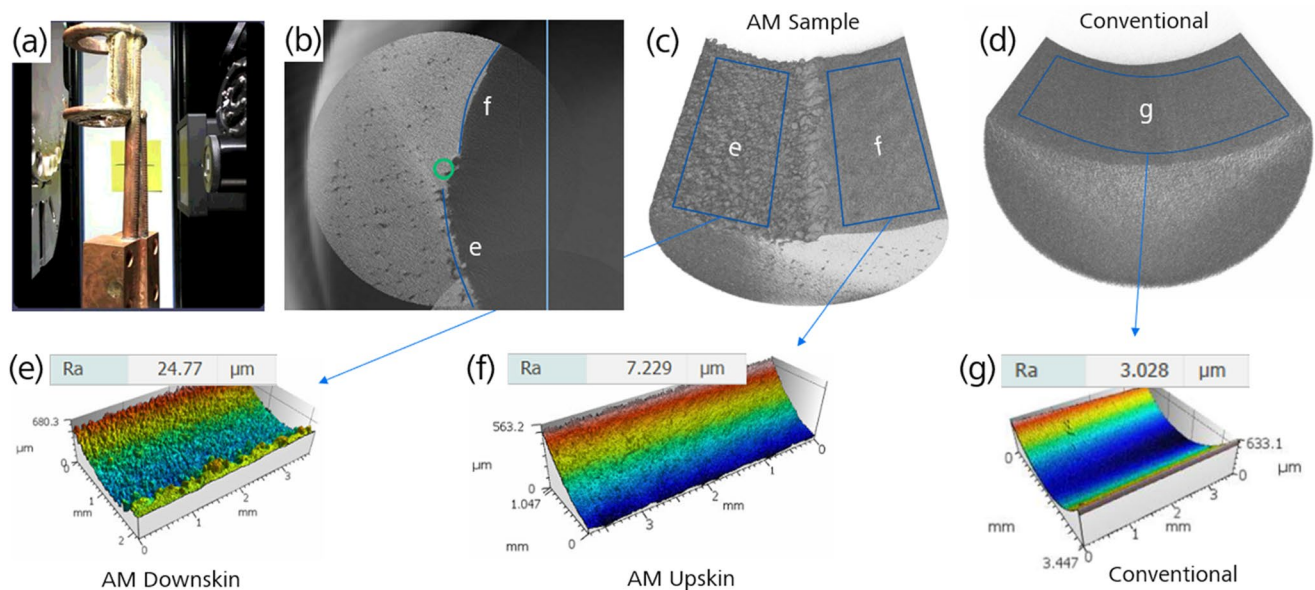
Workflow for inspecting internal surfaces using 3D X-ray microscopy: (a) Part placement, (b) View perpendicular to the longitudinal axis, (c) AM 3D surface, (d) Conventional 3D surface, (e) AM downskin, (f) AM upskin, and (g) Conventional pipe surface
